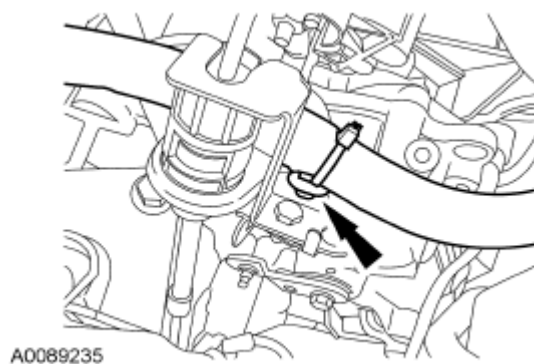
Locating Pin-Type Retainer From Gearshift Cable Bracket
